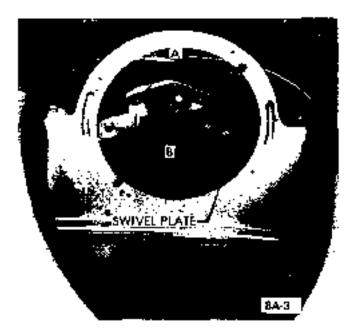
A-3 Headlamp Assembly Rear Adjustment Location
